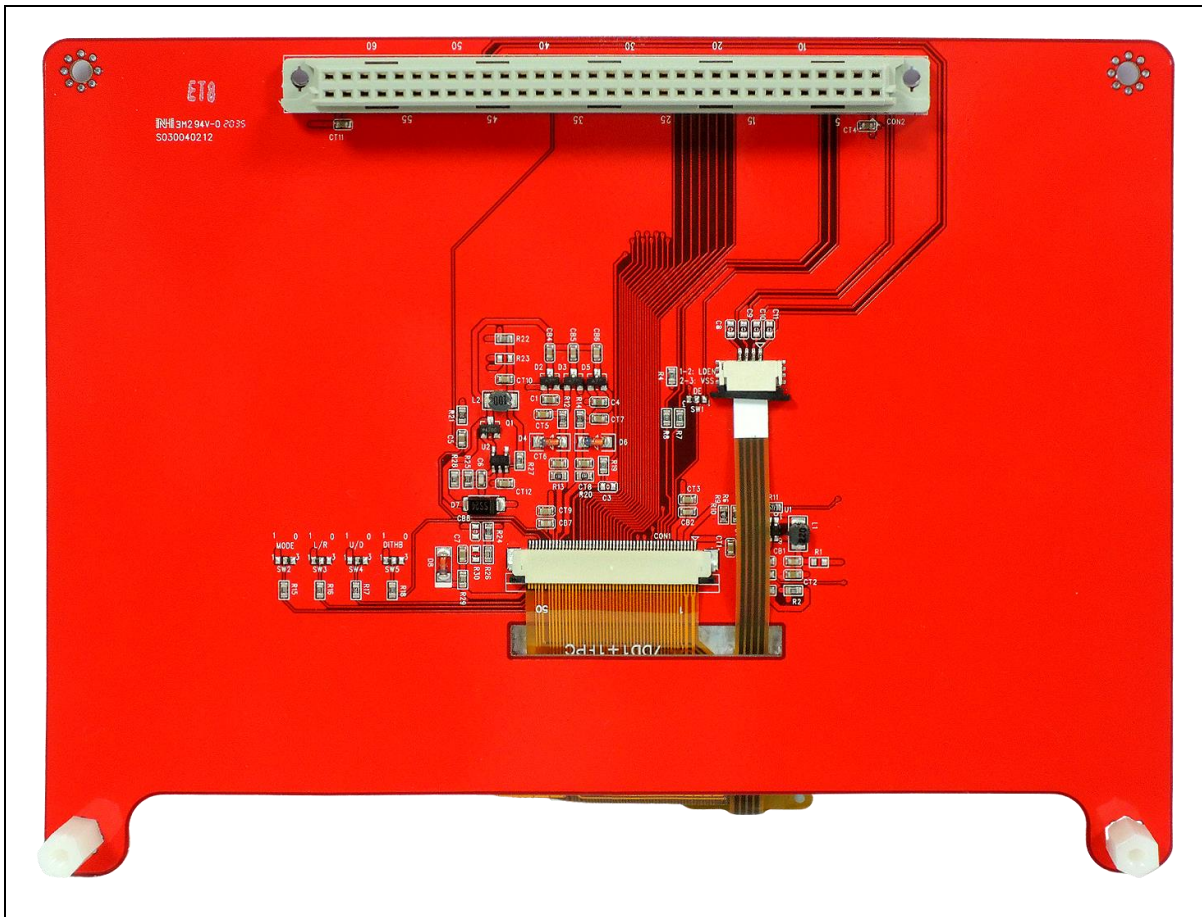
Rear View of NuDesign-TFT-LCD7 Board
